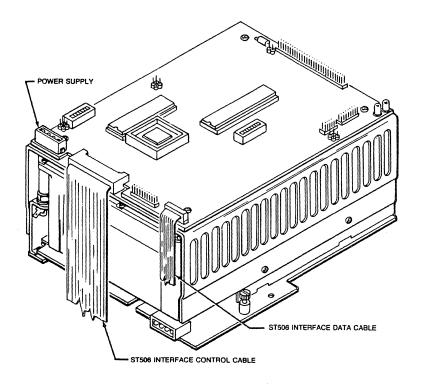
Connecting Disk Drive Data and Control Cables to MD01 Controller
